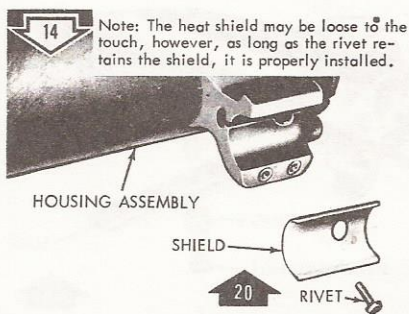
A. Disassembly/Assembly of Grenade Launcher. (Direct and General Support Maintenance) (Page 2 of 6)
